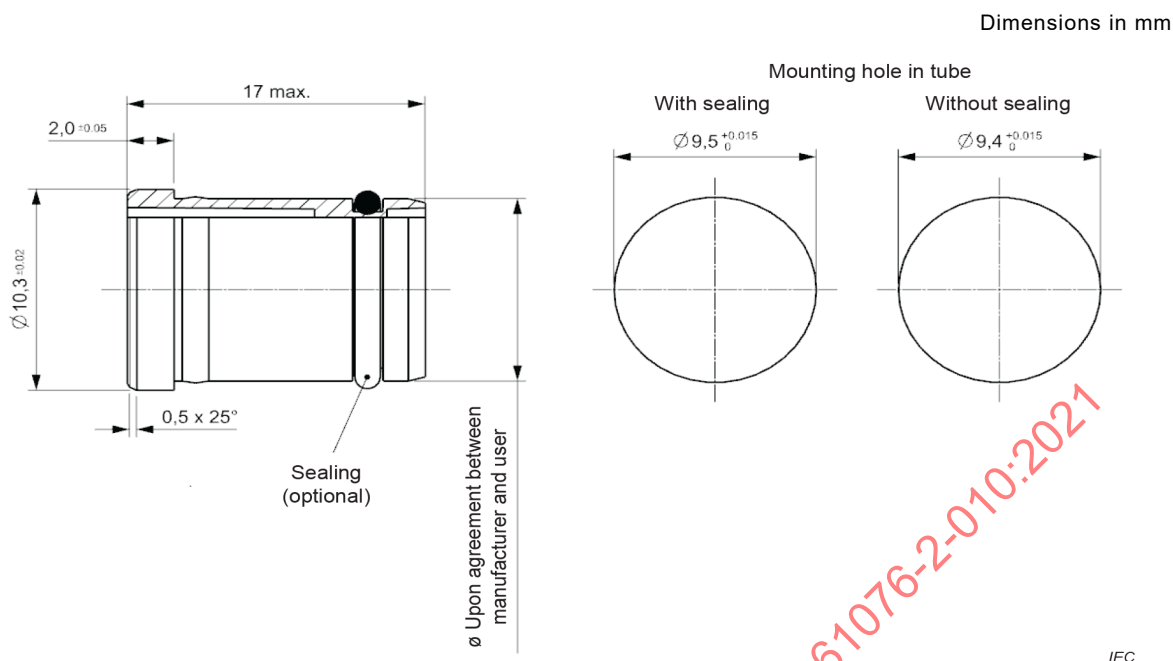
Tube insert, male contacts, thread for M12 screw locking on tube
